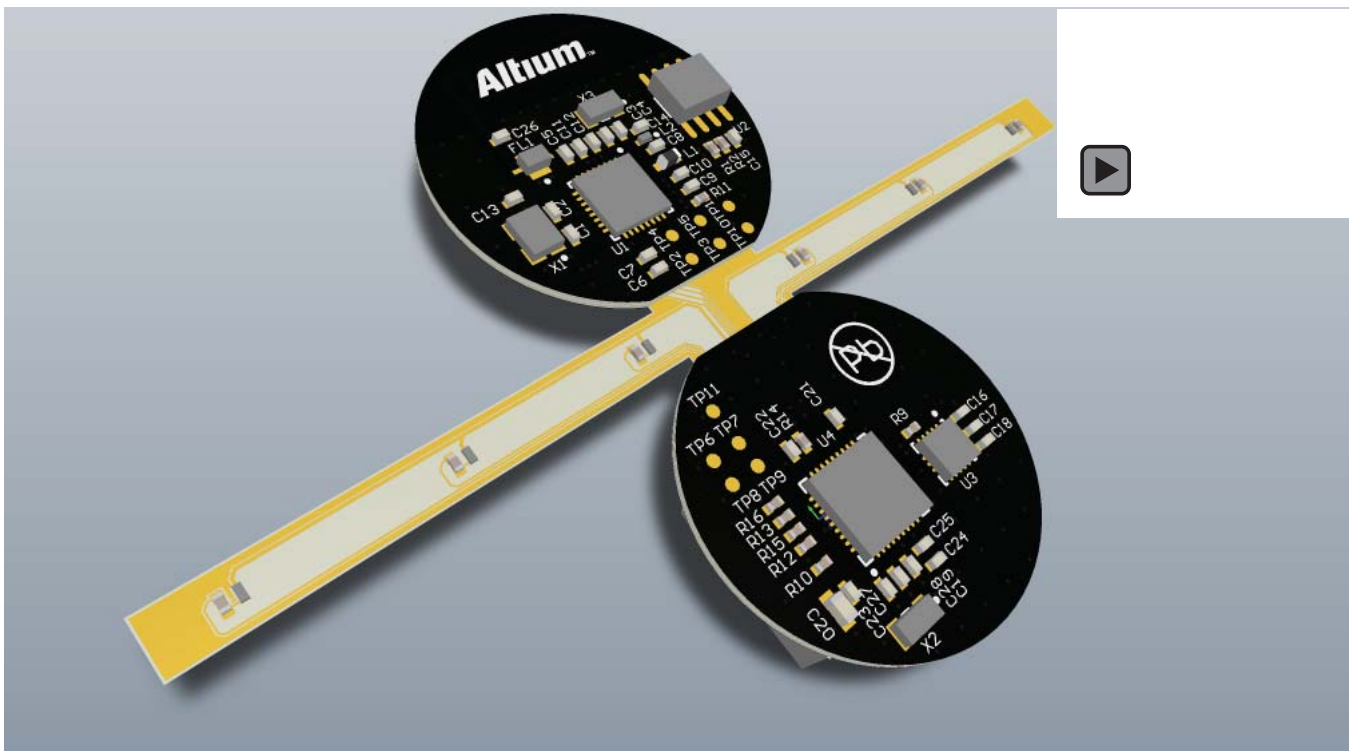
PCB design software that provides 3D modelling lets designers see exactly how the PCB assembly fits together.
